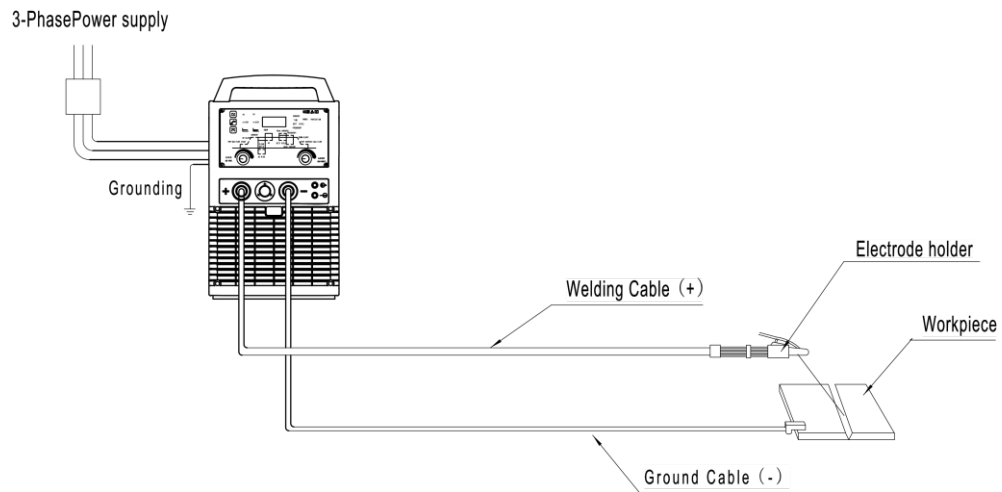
Connection and operation for SMAW welding
